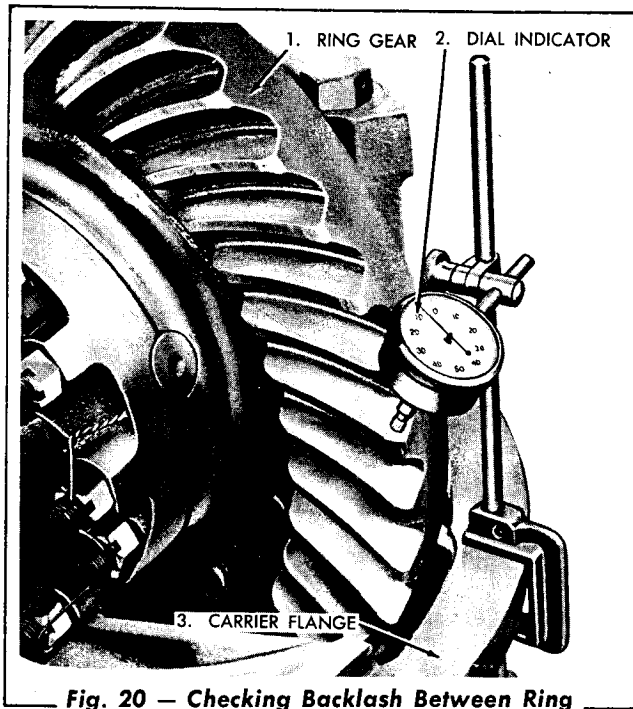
Checking Backlash Between Ring Gear and Pinion Gear
